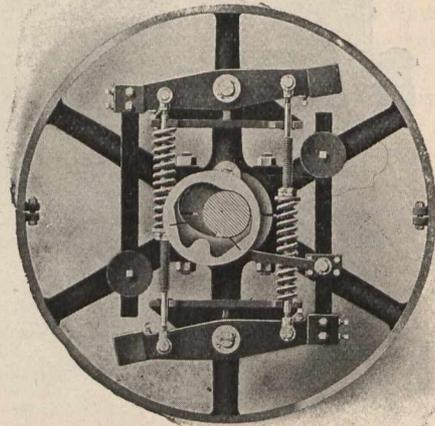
Atlas Automatic Shaft Governor four-valve centre crank type.
